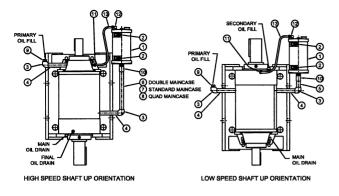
Vertical Service Shaft Orientations (Standard Reducers)
